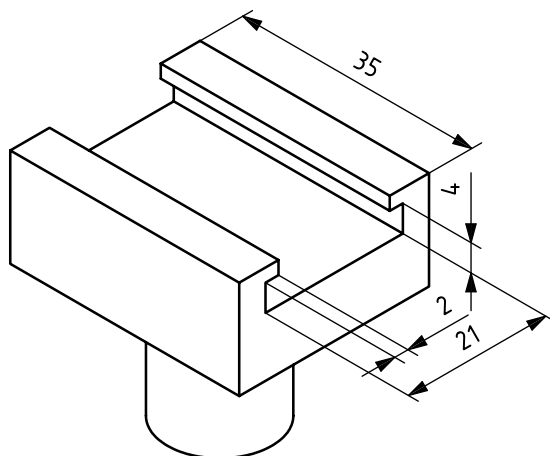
Adherent-plate holder ($\pm 2 \text{ mm}$ for 35 mm, otherwise $\pm 1 \text{ mm}$)
